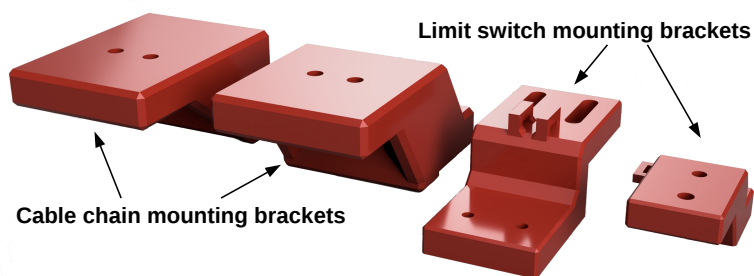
3D printed switch and cable chain mounting brackets.
